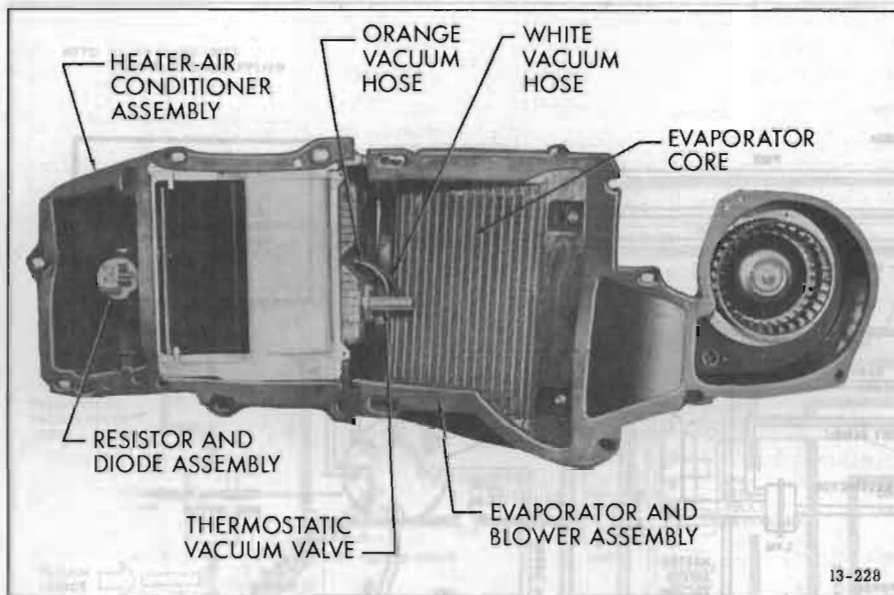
Evaporator and Blower Assembly and Air Conditioner - Heater Assembly (Rear View) (49000 Series)
